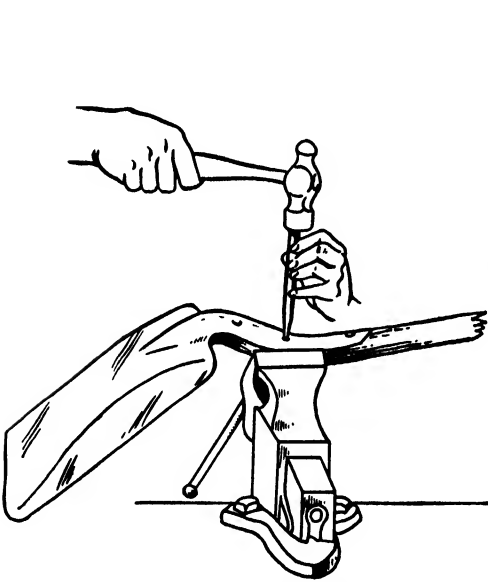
To remove a broken shovel handle, grind or cut off the heads of the rivets and remove them by punching.
